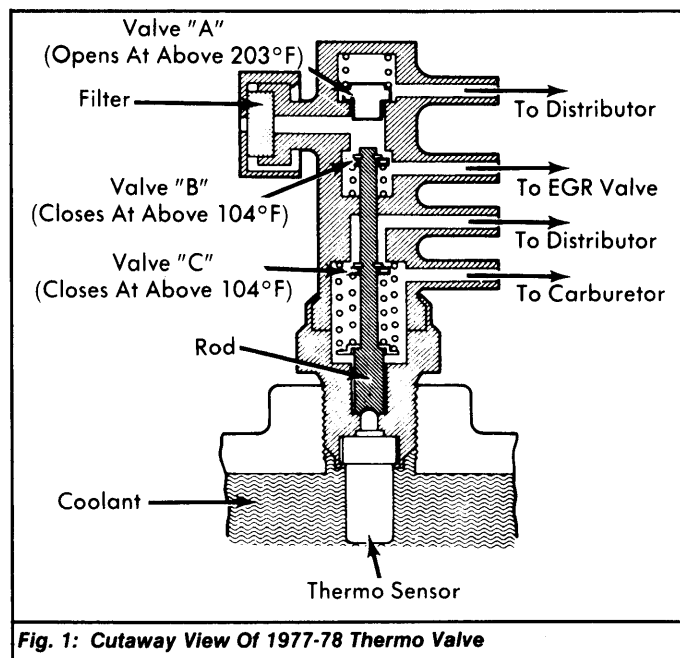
Cutaway View Of 1977-78 Thermo Valve
